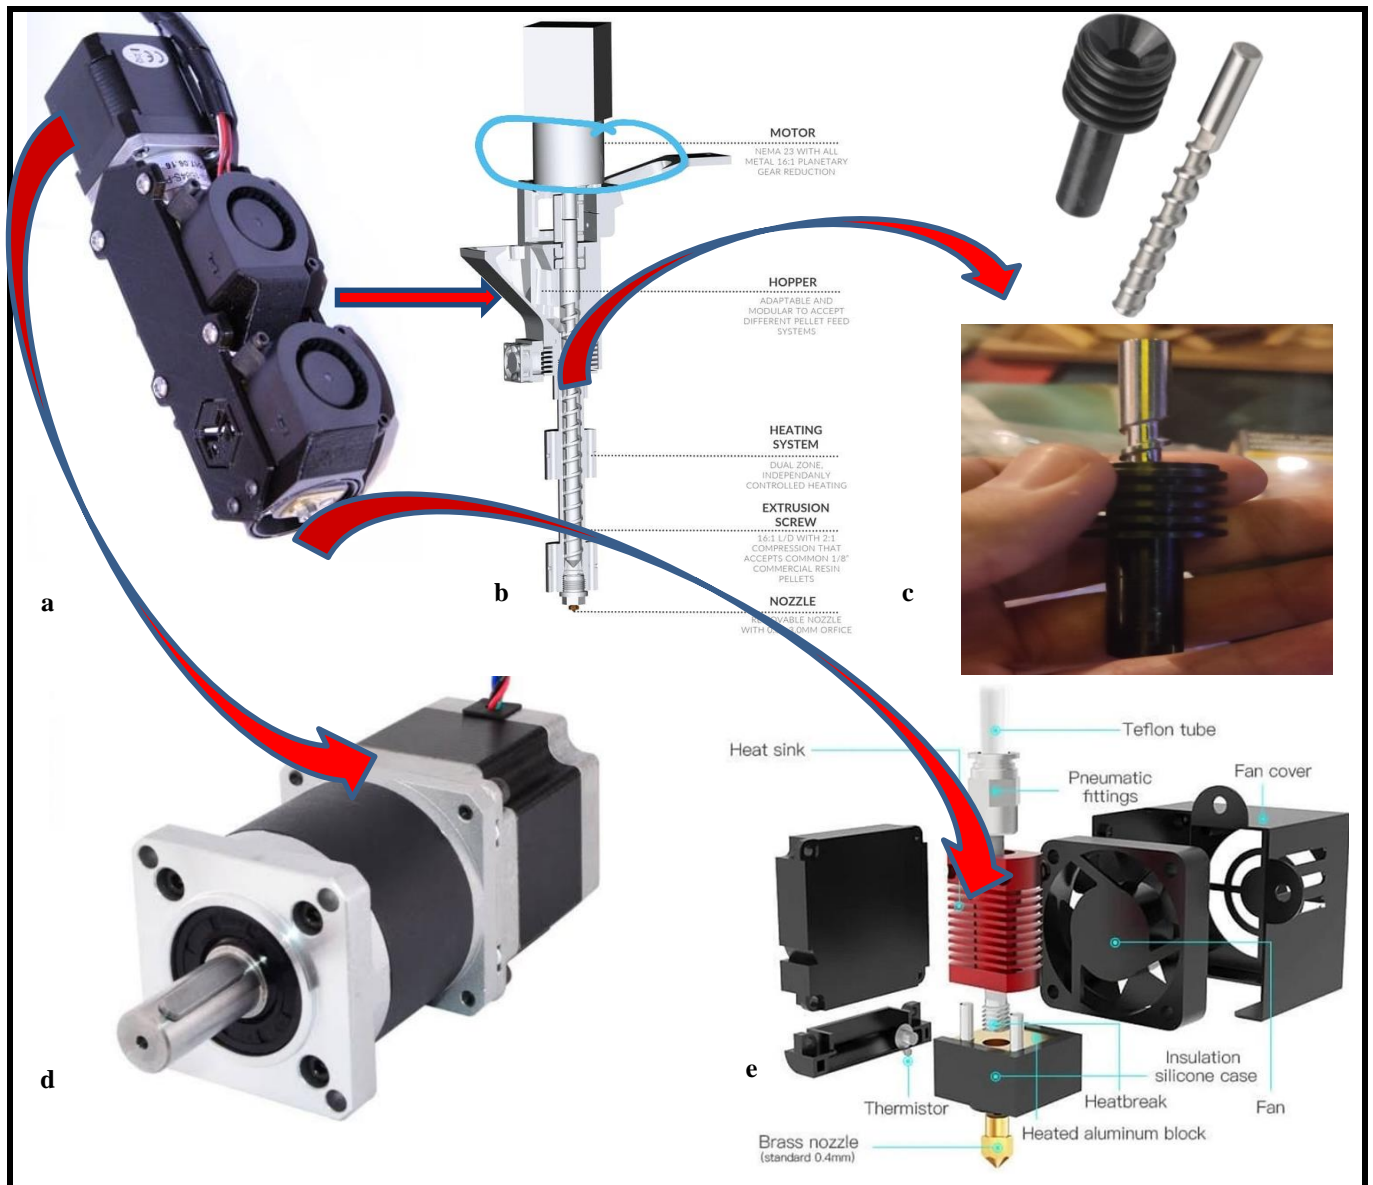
System parts supplied for use in the pellet extrusion system and design plan
